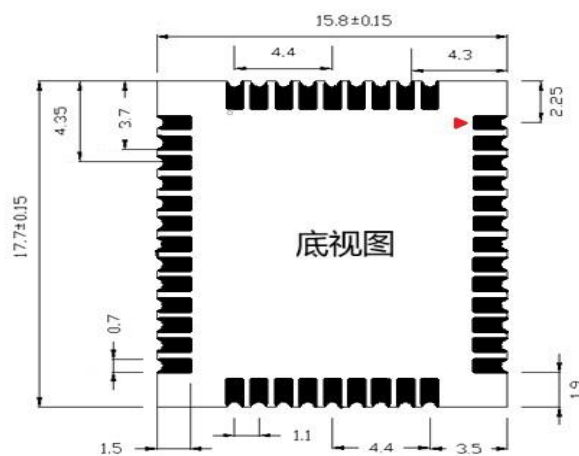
LPM2100 mg module bottom view (unit MM)
